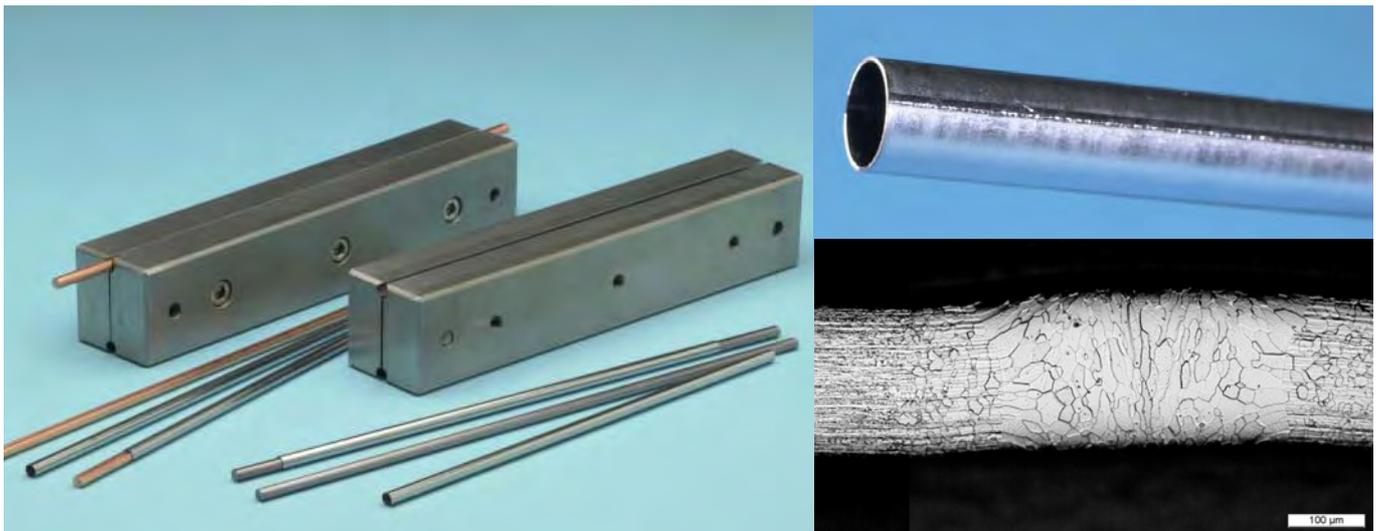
Manufacturing of thin walled Mo41Re tubes by seam welding
